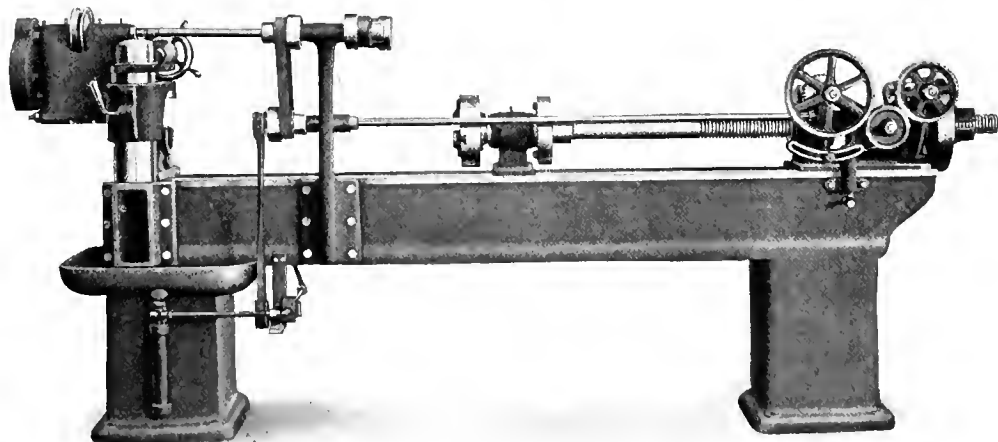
Rear View of Thread Milling Machine, showing Feed Connections
